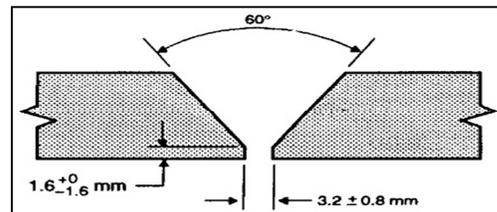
Schematic view of the sheets arrangement during the welding
